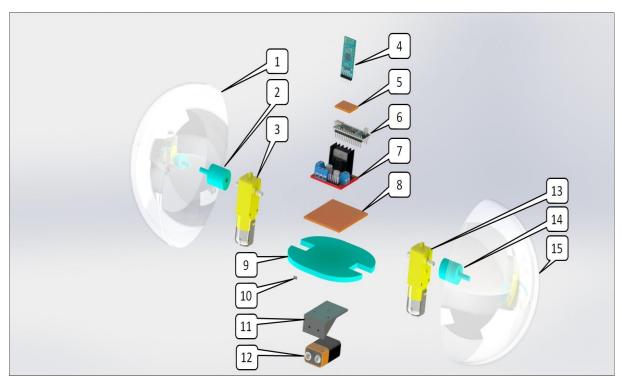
Design of a typical spherical robot (the radius of the spherical robot is 80 mm.)parts of spherical robot: 1&15= spherical shell (acrylic), 2&14= connector (3d print), 3&13= dc gear motor, 4= bluetooth module, 5&8= circuit board, 6= arduino nano, 7= motordriver, 9= support plate (3d print), 10= switch, 11= battery housing, 12= 9v battery
